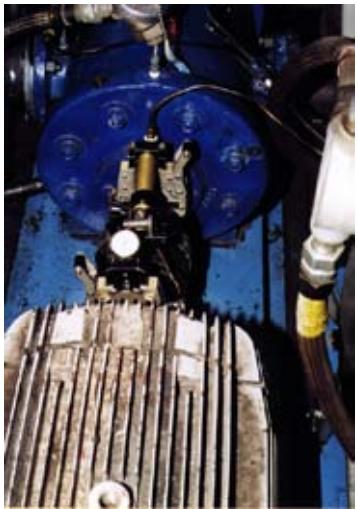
Shaft alignment measurements taken using the Reverse Indicator method.
